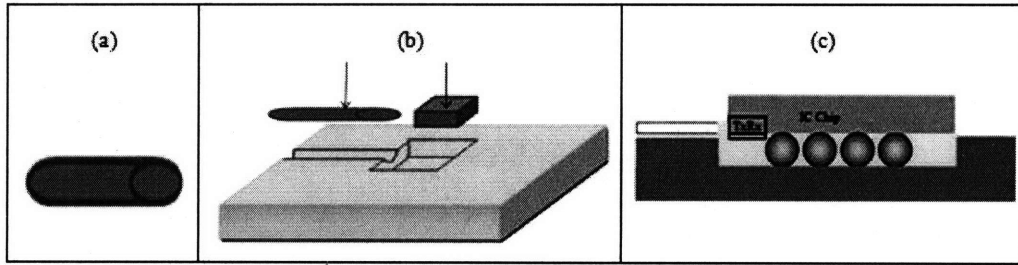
(a) Optical solder coated fiber, (b) Chip placement into the hole with optical solder coated fiber in place, (c) side view of the fiber and chip in place
